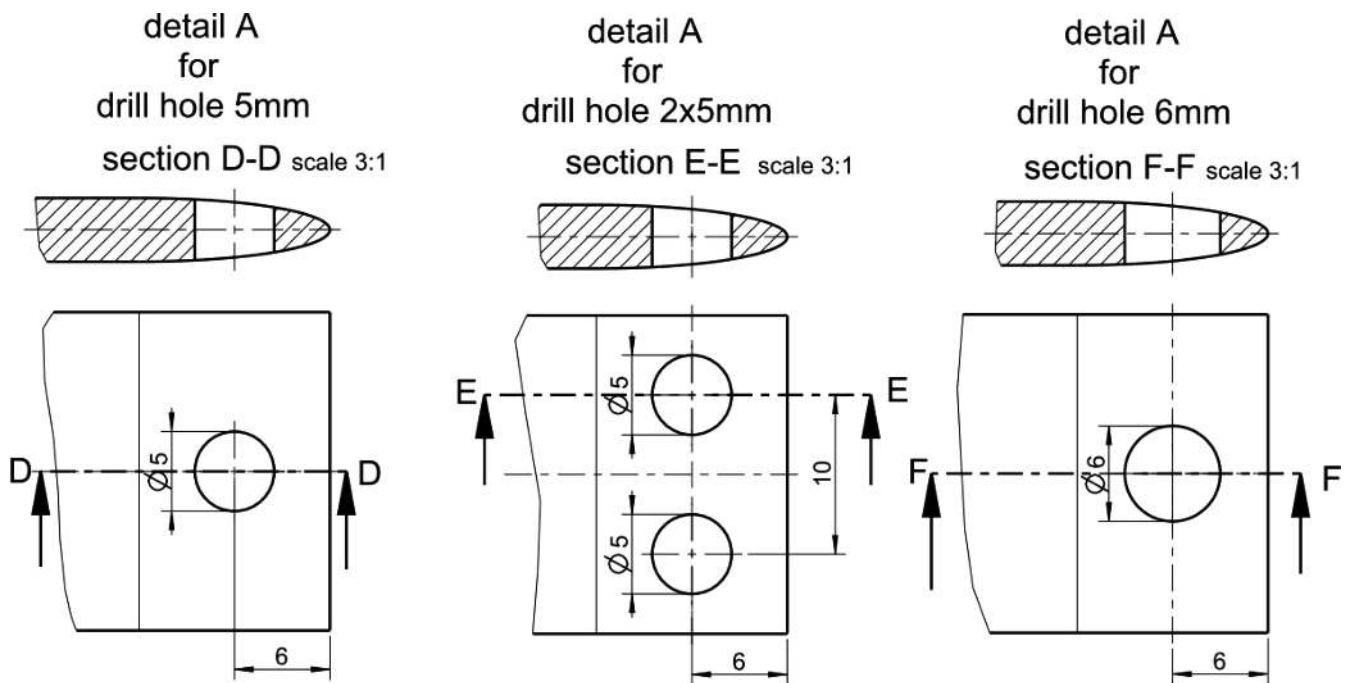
Geometry for specimen with drill hole (5 mm, 2 × 5 mm and 6 mm diameter)
